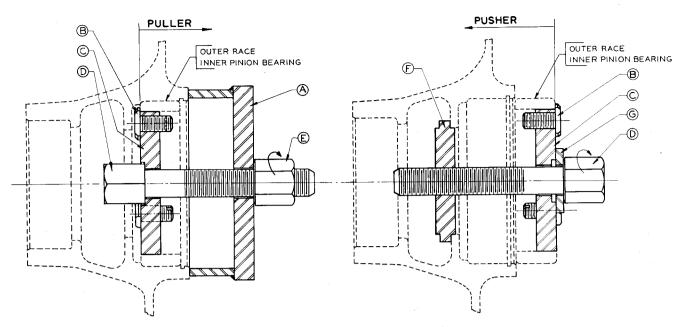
72056X PINION INNER BEARING OUTER RACE PULLER AND PUSHER
